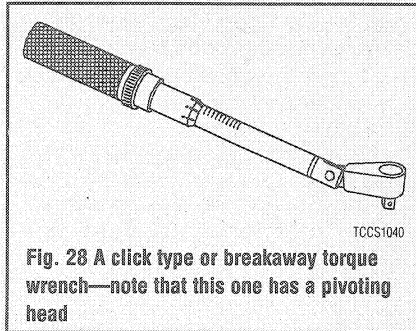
A click type or breakaway torque wrench—note that this one has a pivoting head
